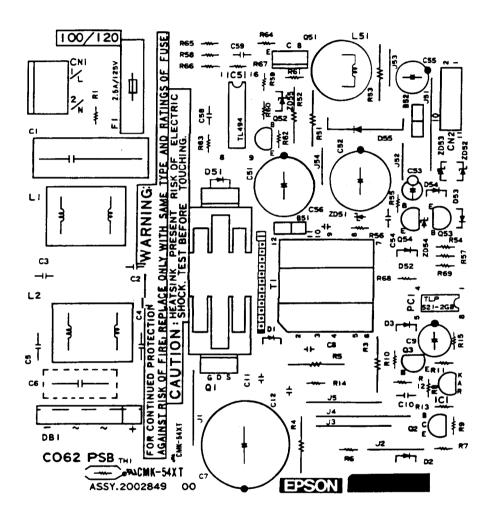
BOARD ASSY., POWER SUPPLY (C062 PSB BOARD) Component Layout
